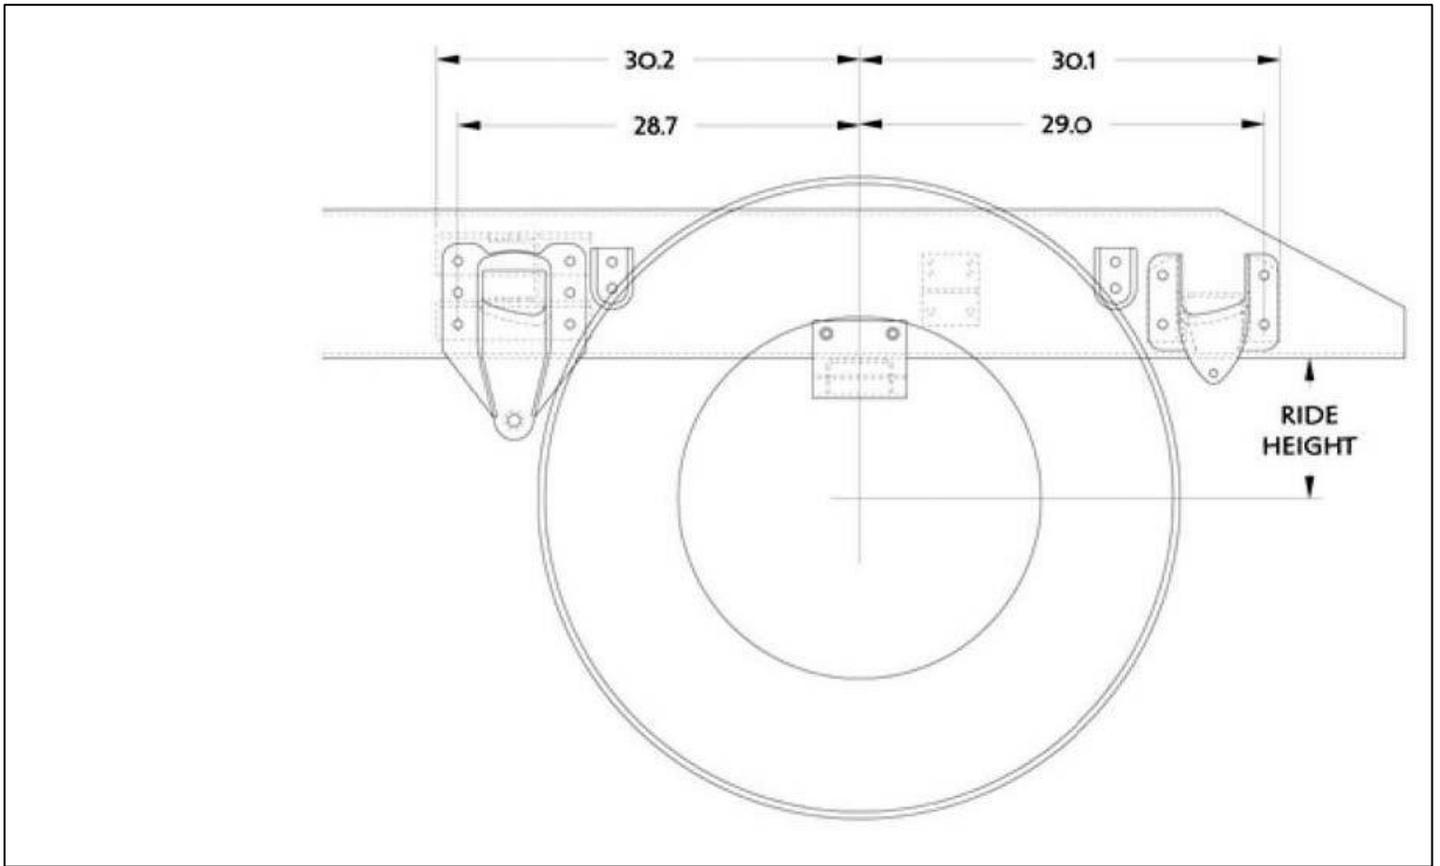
Reycor 79KB Frame Drilling (Dimensions In Millimeters)
